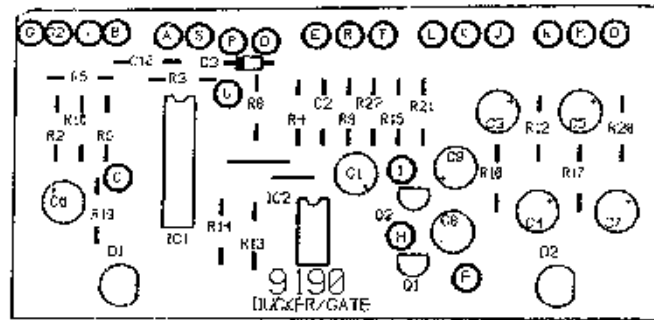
Parts Placement. Components mount on the circuit board at the locations shown above.
